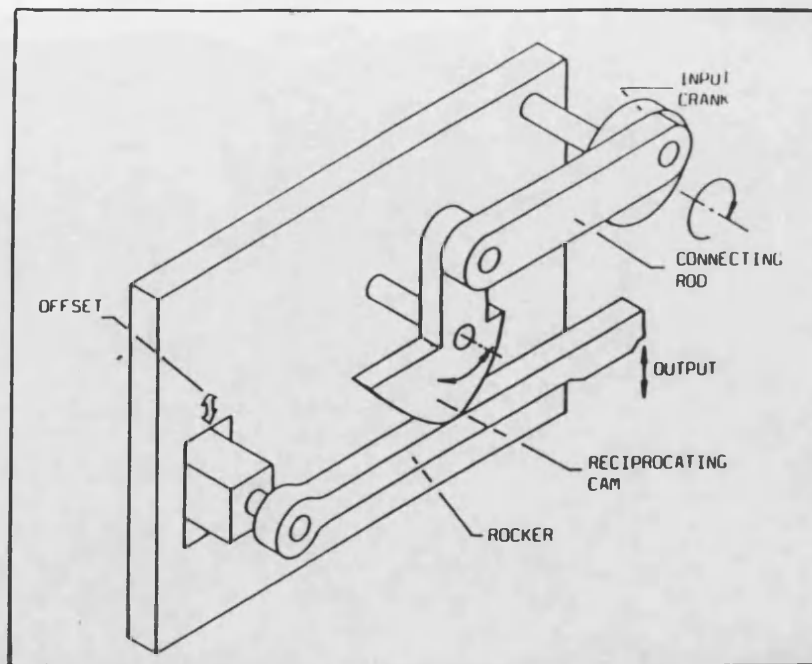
Reciprocating cam with adjustable rocker mechanism.
